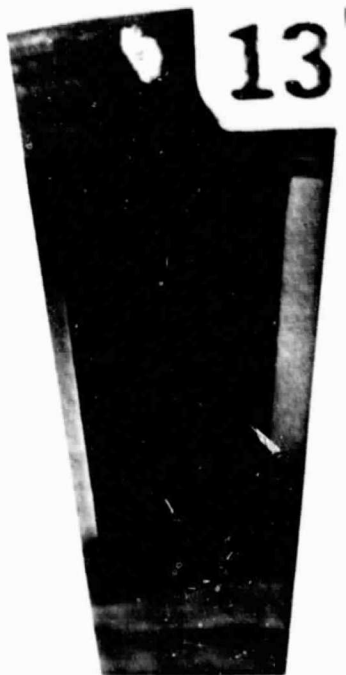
Wax Pattern for ACC Slip Casting Made From Ford Model 820 Stator Injection Molding Tool
